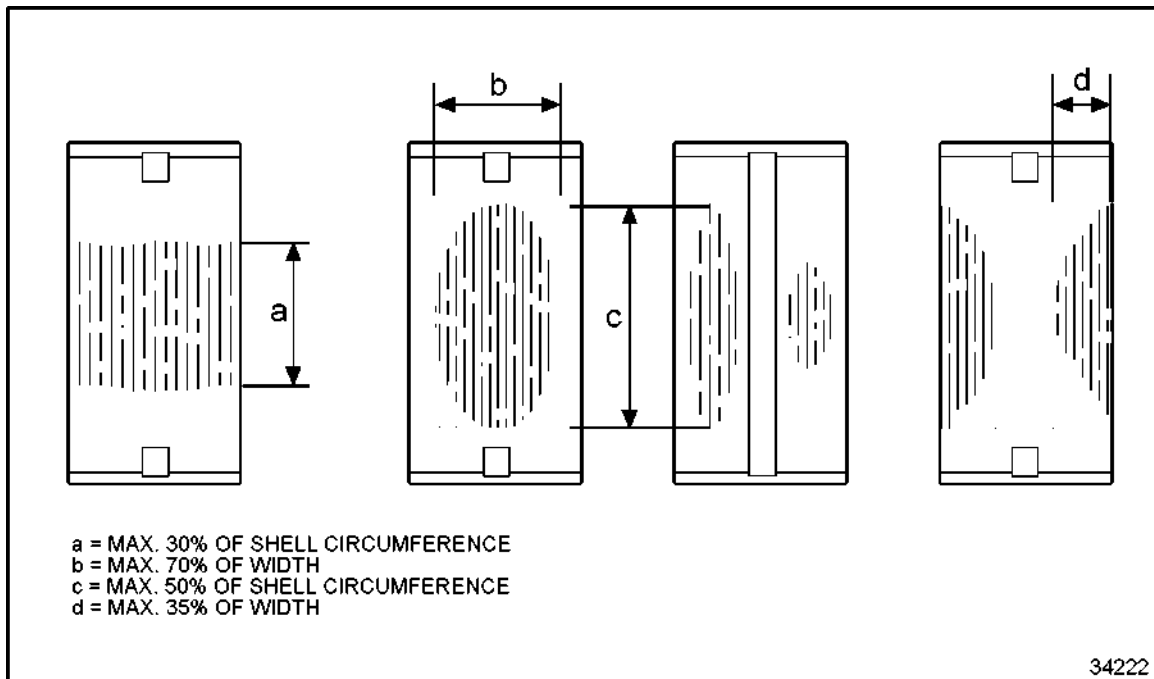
Wear Limits: Wear Layer Fatigue Fractures
